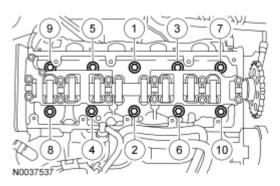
Locating Cylinder Head Courtesy of FORD MOTOR CO.
